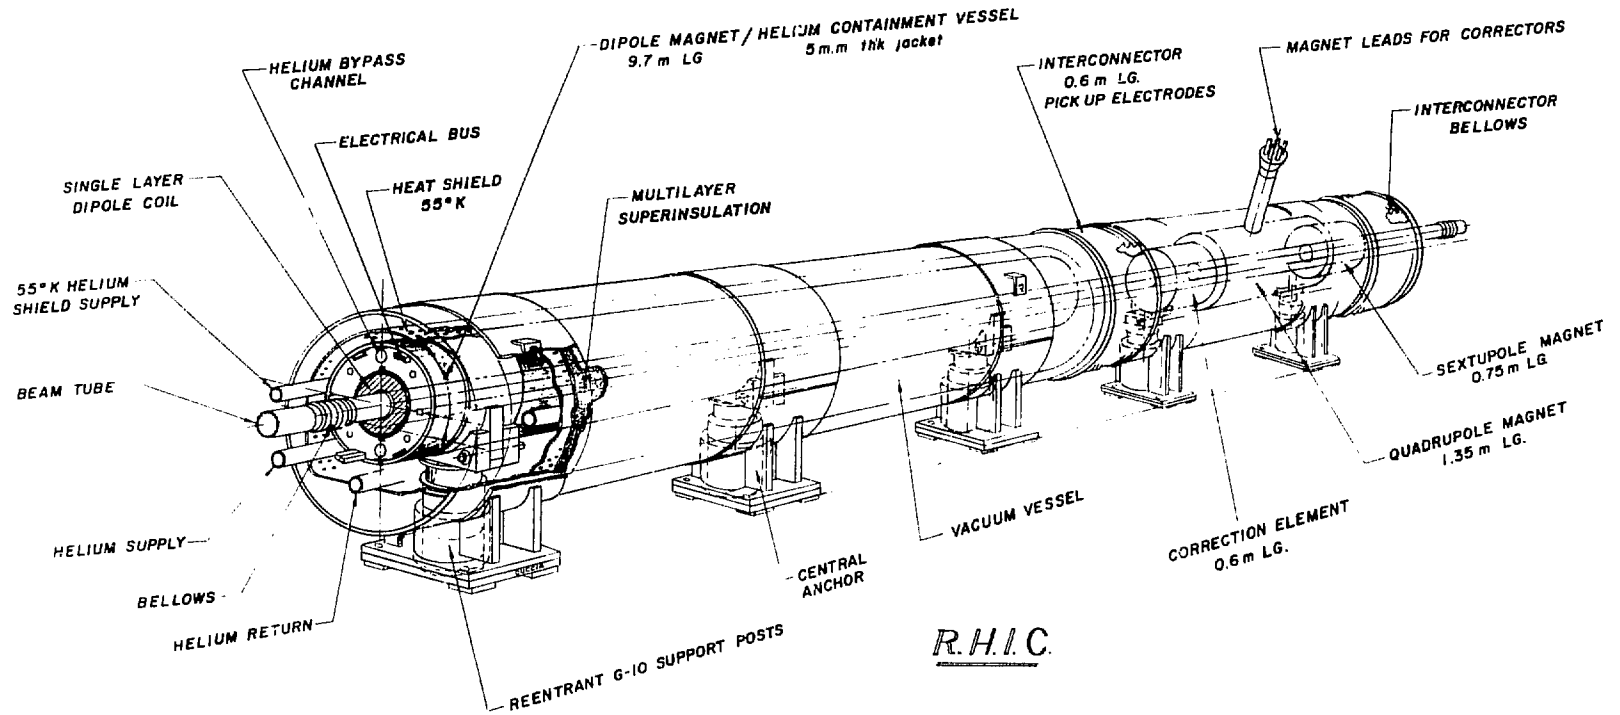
RHIC magnet assembly: The drawing shows a half-cell of the arc magnet lattice, including a dipole, corrector package, quadrupole and sextupole magnets enclosed in their cryostat.
